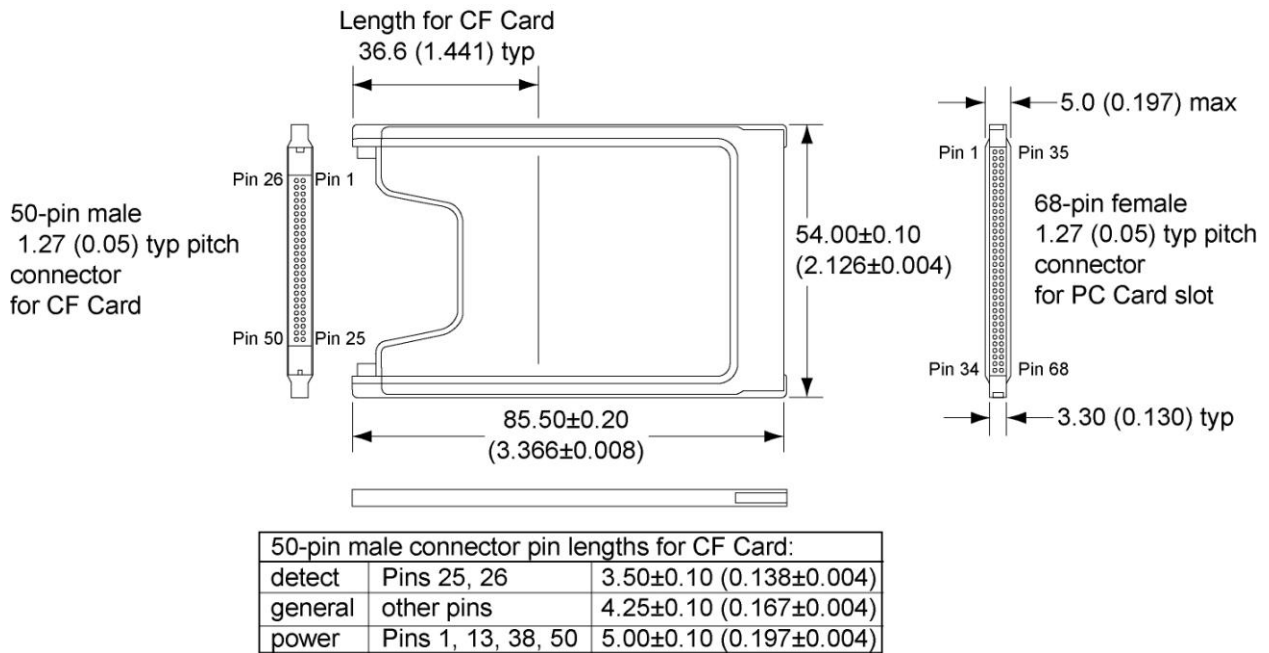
Mechanical dimensions CF Adapters (Type I and Type II)
